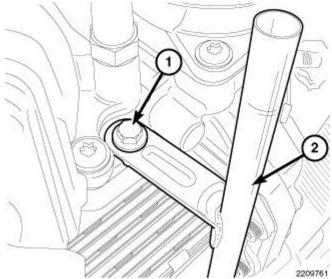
Oil Level Indicator Tube Courtesy of CHRYSLER LLC
